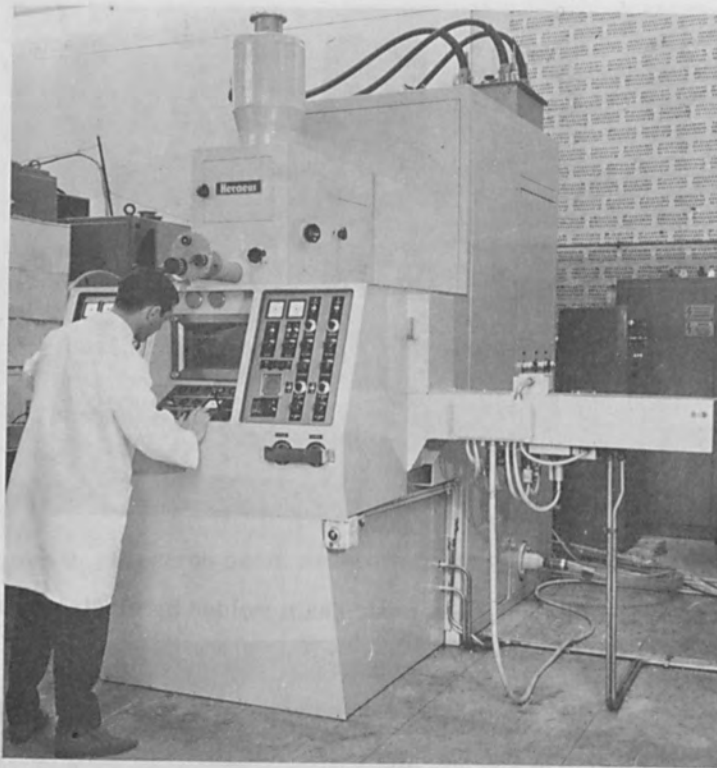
Front view of production electron beam welder Heraeus ESW 900/3.
